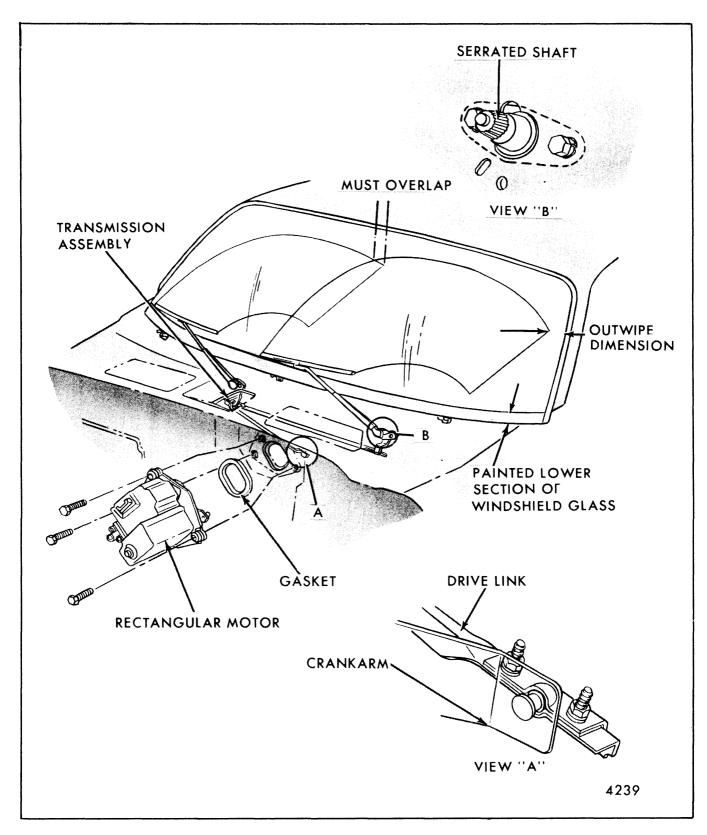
Wiper Installation and Wipe Pattern - "F" Styles
